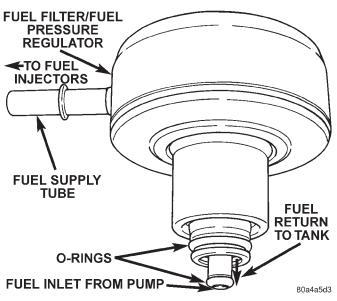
Fuel Filter/Fuel Pressure RegulatorO-Rings
